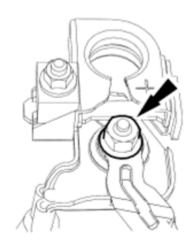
Locating Wiring Harness Retainers Courtesy of FORD MOTOR CO.
